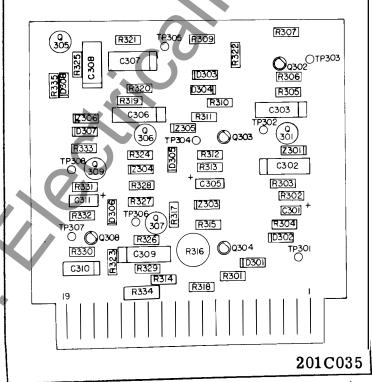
Component Location of the Output Board for the Type STU Relay.
